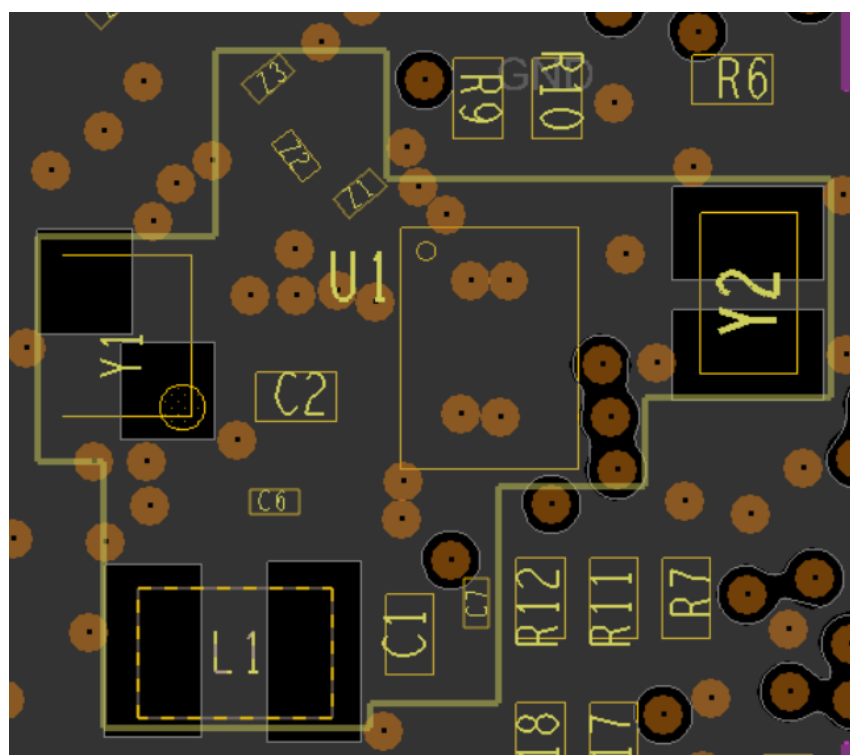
FCGQFN24 PCB Placement and Routing – GND Plane - INT1 Layer
